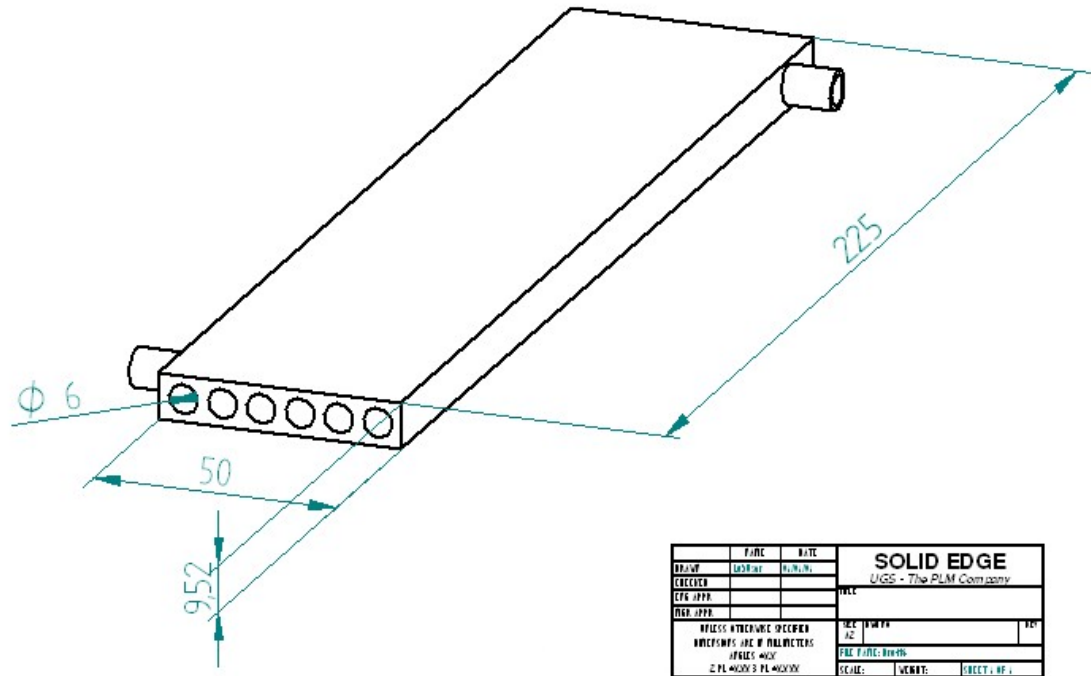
Designed flat plate heat exchangers showing dimensions
